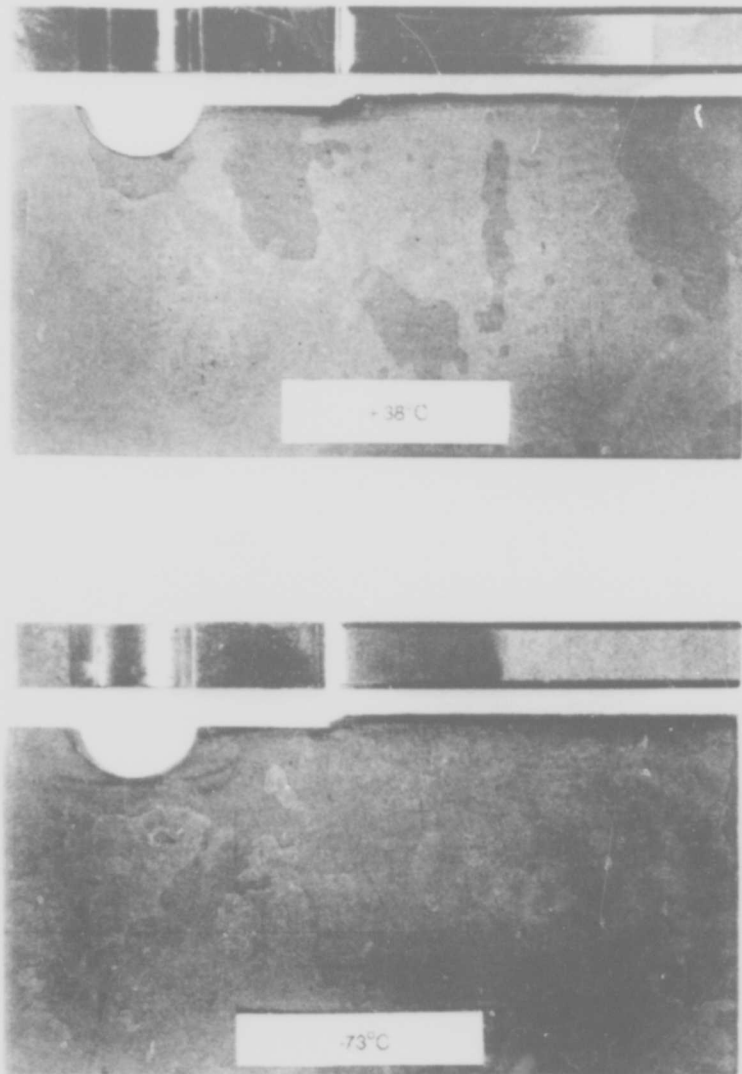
Fracture appearances of the crack arrest fracture toughness specimens for both 38°C (top) and -73°C (bottom).
